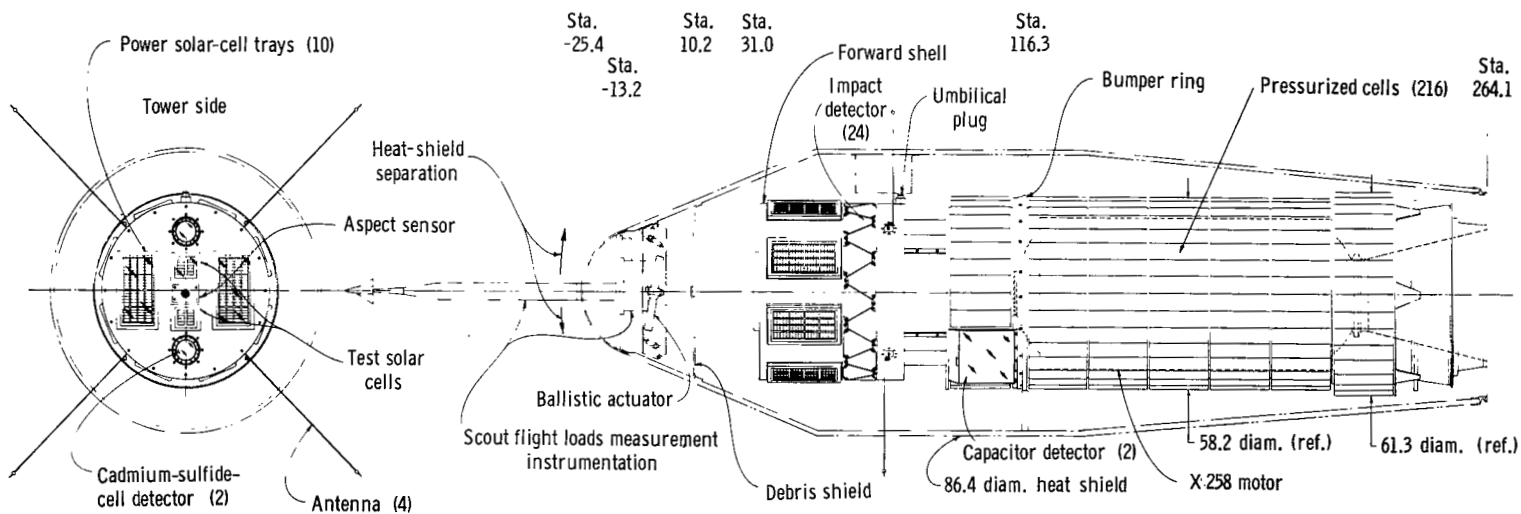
Payload assembly drawing. All dimensions are in centimeters.
